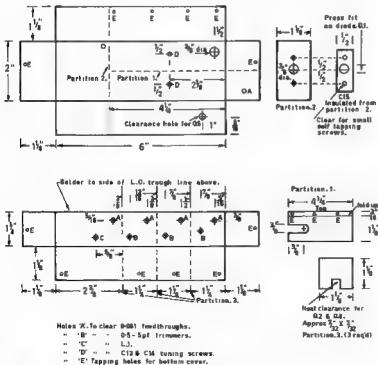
SHEET METAL MAIN CHASSIS DIMENSIONS.
